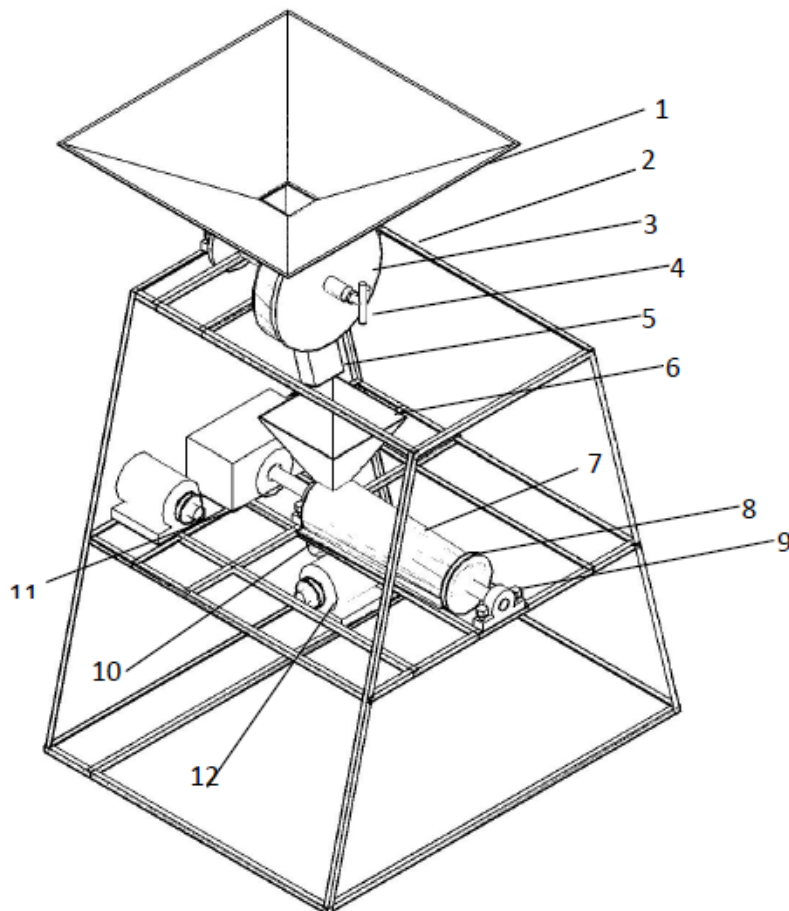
Isometric view of the developed motorized ginger juice expression machine.
